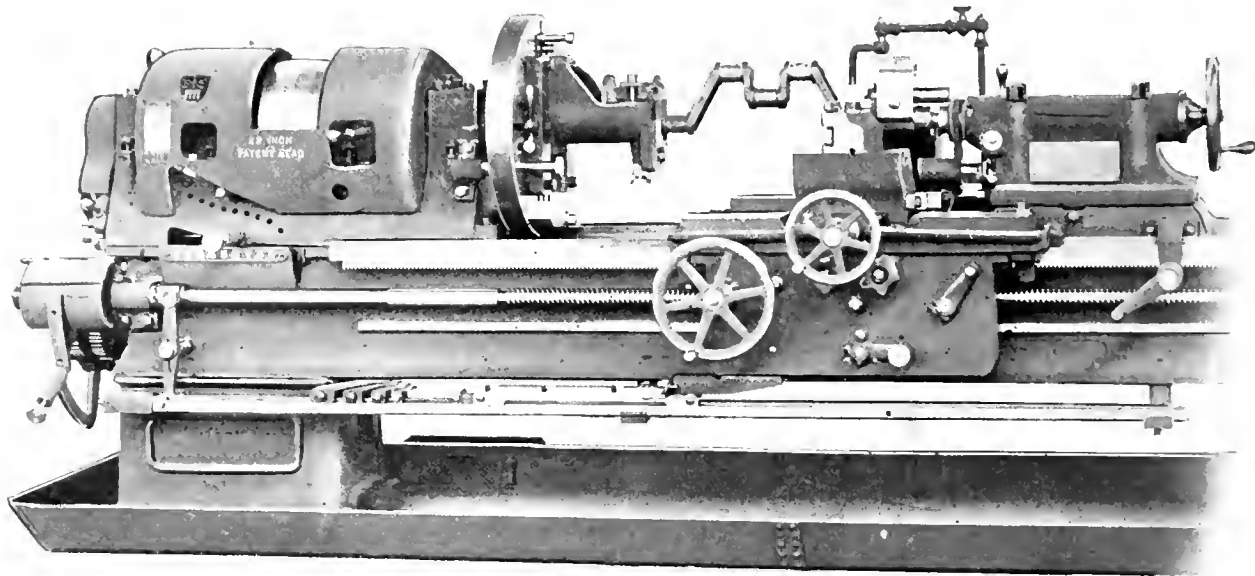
Lathe, provided with Special Chucks, Tool-posts and Stop Mechanism for Turning Crank-shafts
